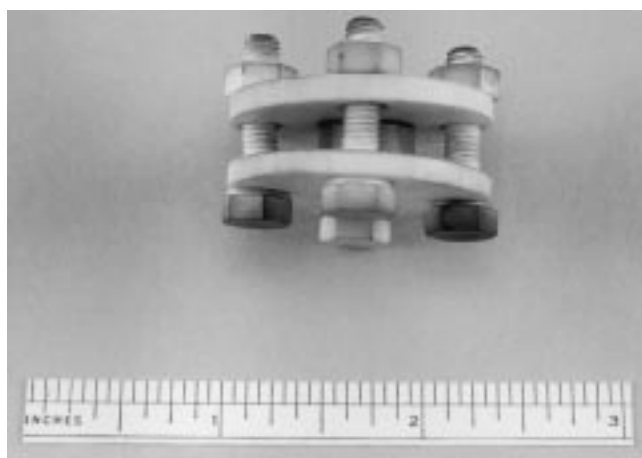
Fixture used in making the MoSi₂/stainless steel joints
